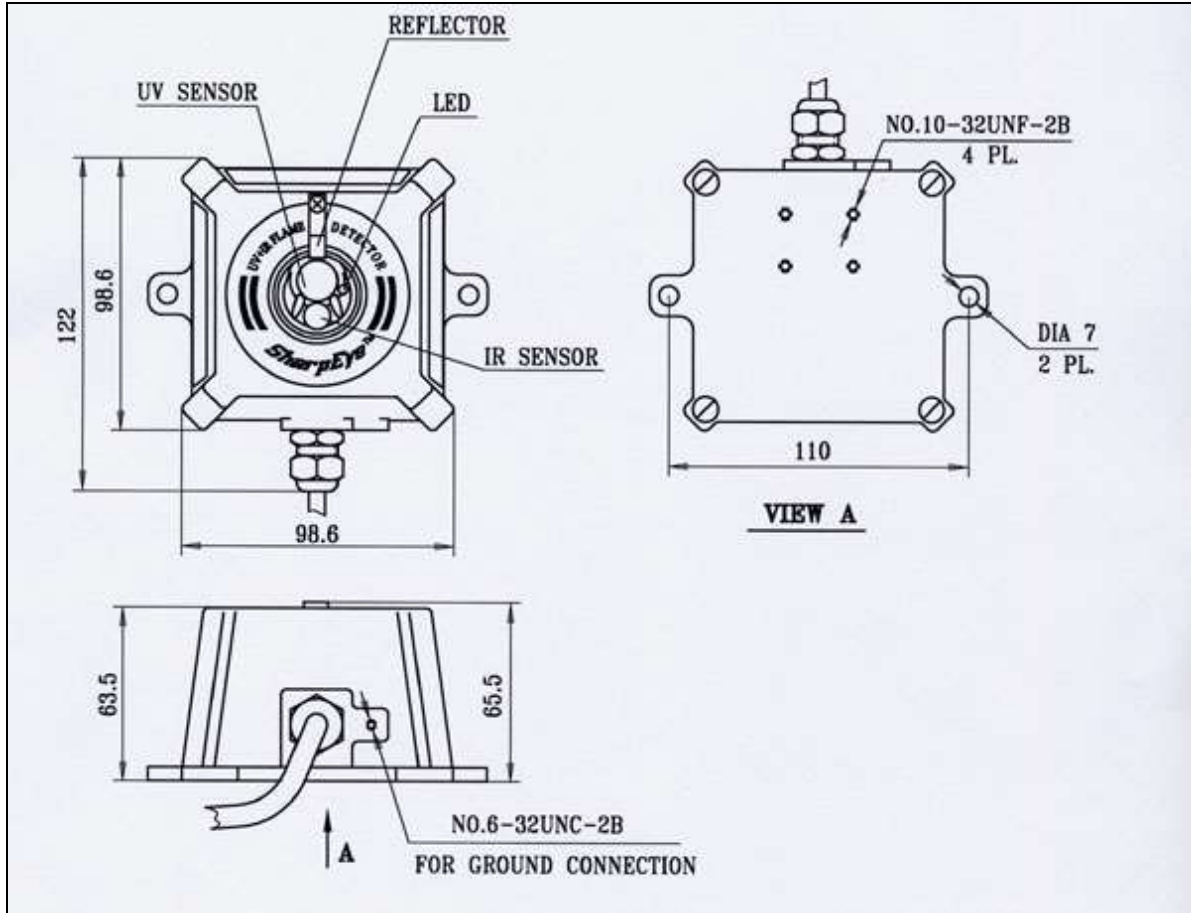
Flame Detector Assembly: Outline Drawing of Cable Output Option
